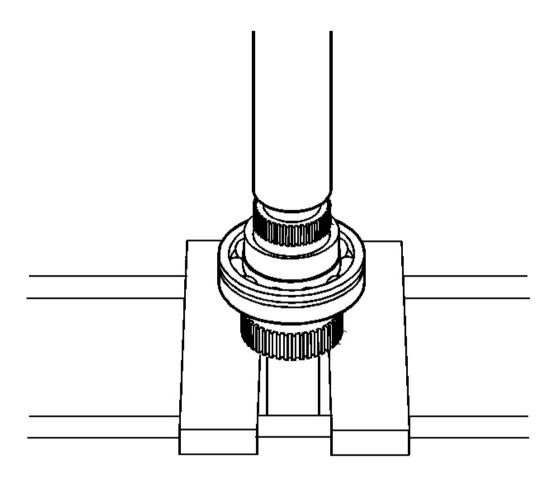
Pressing In Speed Reluctor Wheel Courtesy of GENERAL MOTORS CORP.
